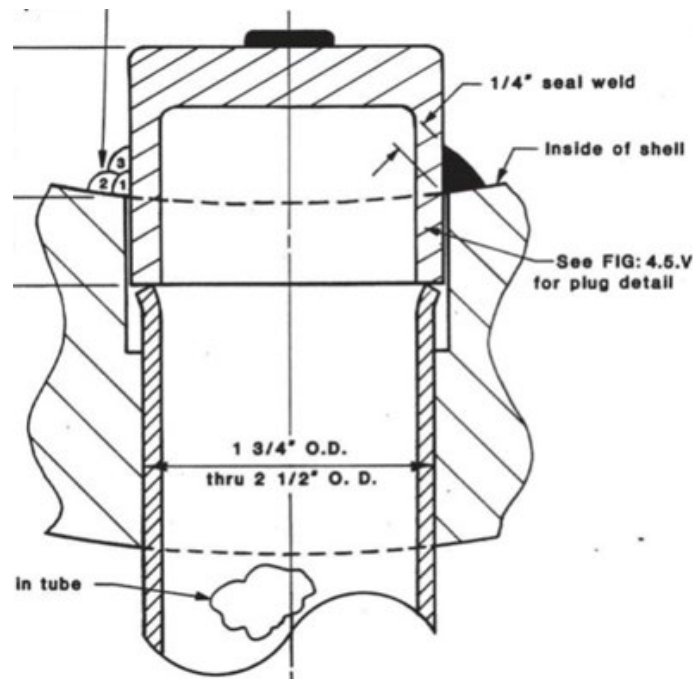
Cylindrical plug in a drum with counter bored tube holes.
